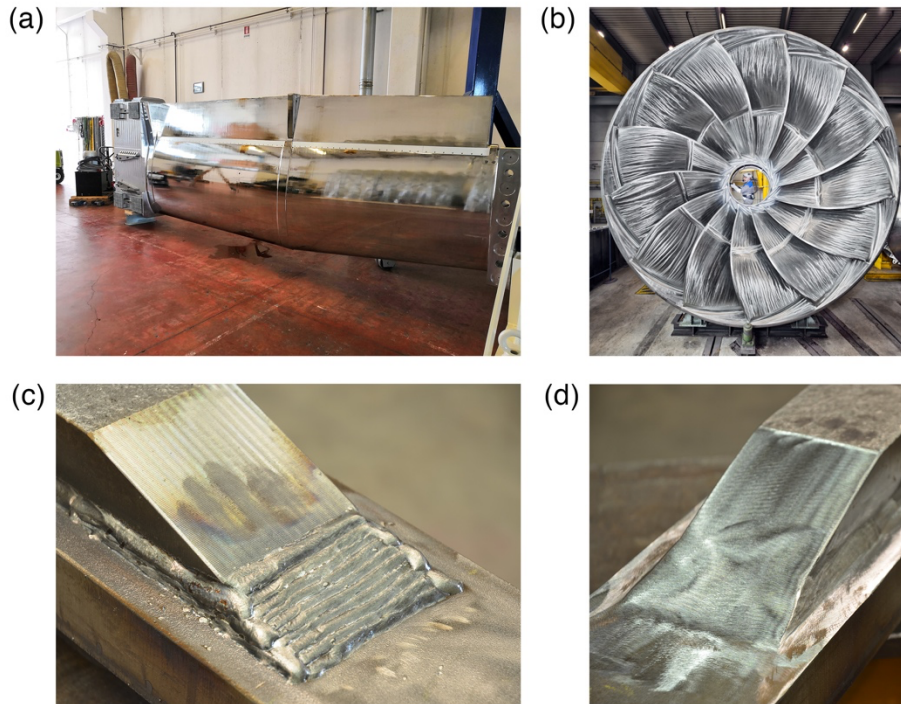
Application of weld profiling for keels of high-speed sailing yachts made of a super-duplex steel (a), Francis turbine runner (b), and end welds of cover plates made of S355 steel before (c) and after grinding (d). Image courtesy of Andrea Canaletti APM keels (yacht keel), Voith Goup (Turbine) and Karl Drebenstedt (end welds of cover plates) [14]
